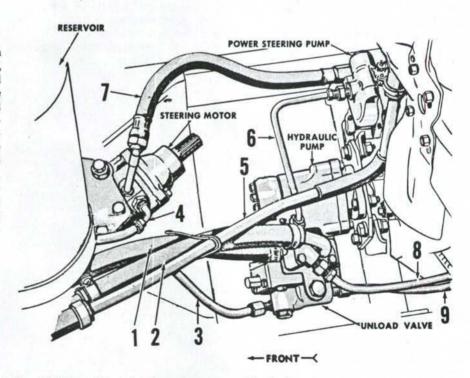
A — View showing arrangement of hydraulic lines, tubes and related parts located at front of tractor. Early model tractor is shown. Later tractors differ in that the power steering by-pass line (6) is now a flexible line that is attached to a "tee" in the unload valve. The power steering return line (4) is now also attached to the "tee" instead of the reservoir.
